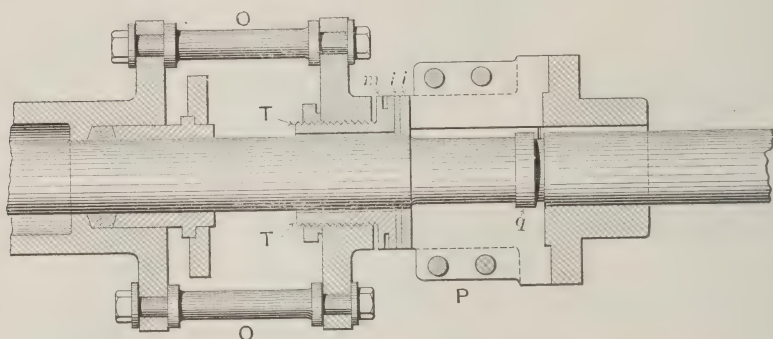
DETAIL OF THRUST BEARING OF PUMP
